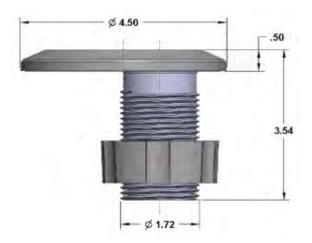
Offset Through-the-Lid Antenna Dimensions
